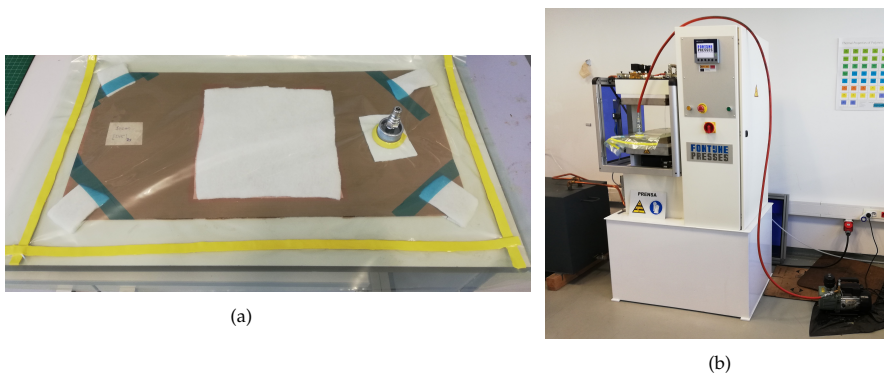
Fabrication of laminates: (a) Hand lay-up laminate in vacuum bag and (b) hot platen press.
